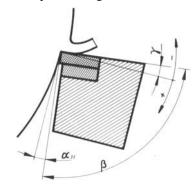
Angles at cutting tools: α - clearance angle; β - sharpening angle; γ - rake angle
